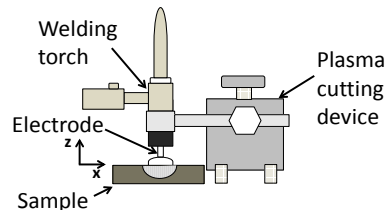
Adaptation of the welding torch to plasma cutting device
